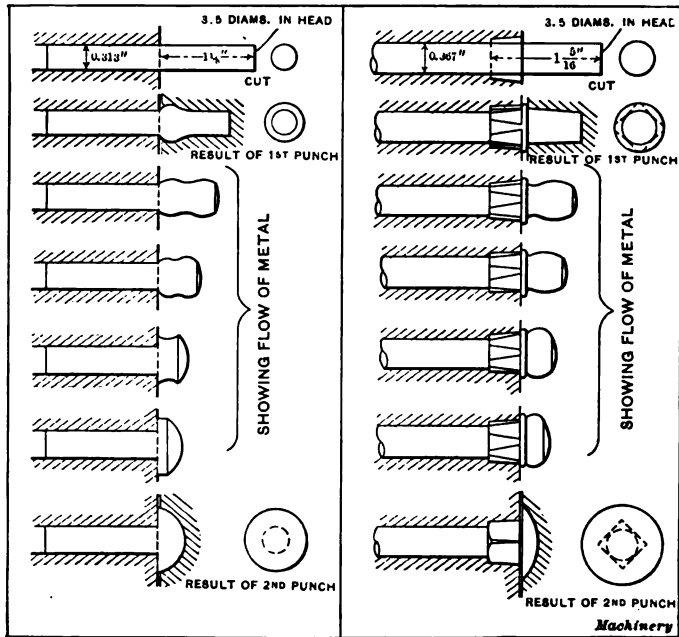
Evolution of Screw Blanks made on Double-stroke Cold-headers
